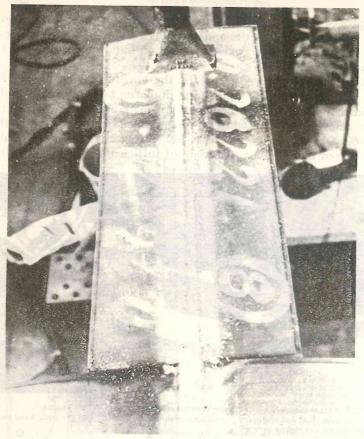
Test plate attached to section of boiler shell awaiting stamping before being detached and sent to laboratory. The vacuum foot can be clearly seen in the top centre
